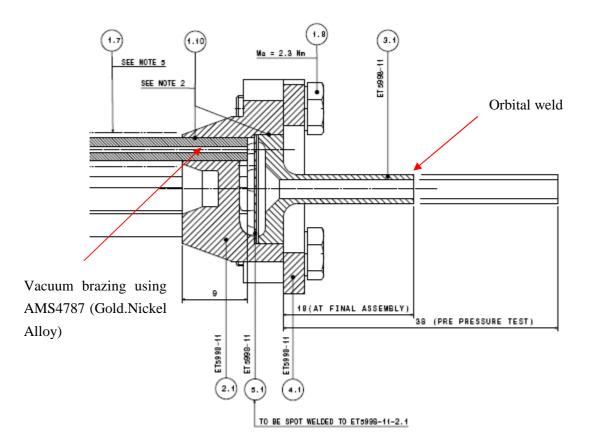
Manifold drawing (from Assembly drawing of condenser: no bolts will be used during the brazing and length of manifold connecter (right) is 51.5 mm)
